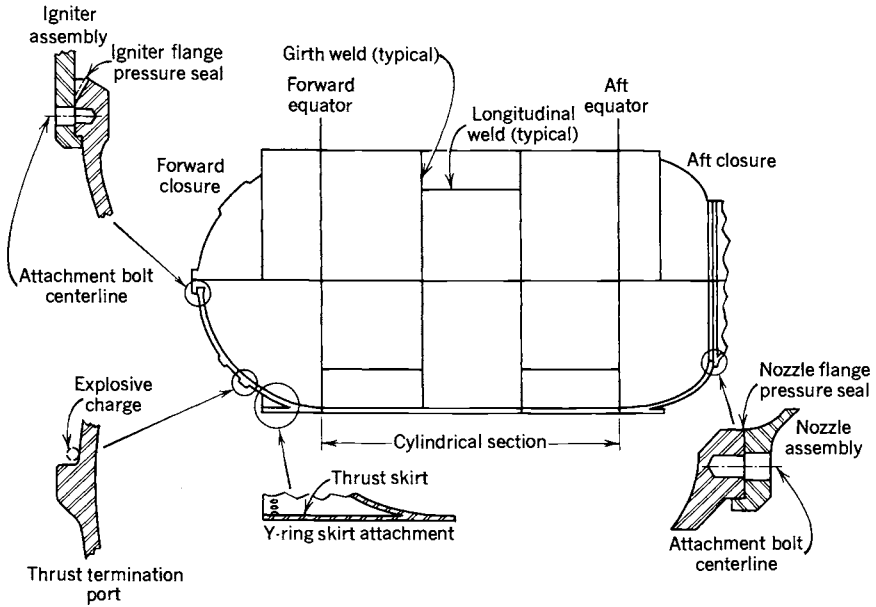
Typical large solid rocket motor case made of welded alloy steel.
